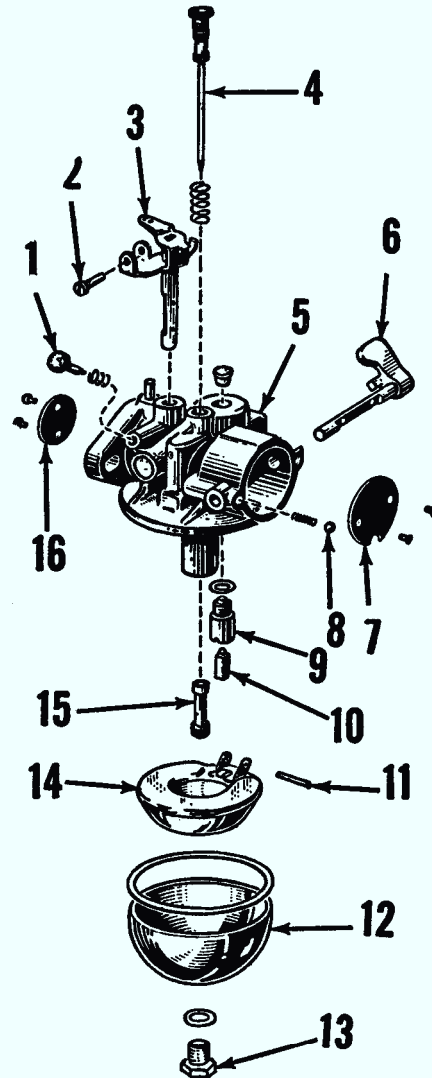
Exploded view of typical Carter model "N" carburetor. Design of float and float bowl may vary from that shown.
